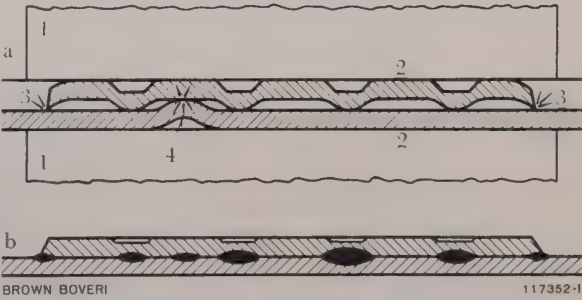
Causes of possible, but avoidable faulty welds
